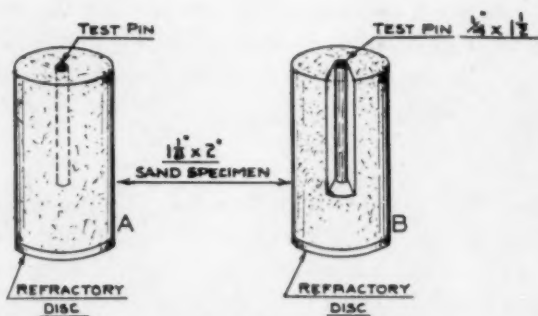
VIEW OF SAND SPECIMENS WITH METAL PINS FOR PENETRATION DEFECT TEST. A—TEST PIN IMMERSED IN SAND SPECIMEN. B—SECTION OF SAND SPECIMEN CUT OUT FOR OBSERVATION OF TEST PIN.
